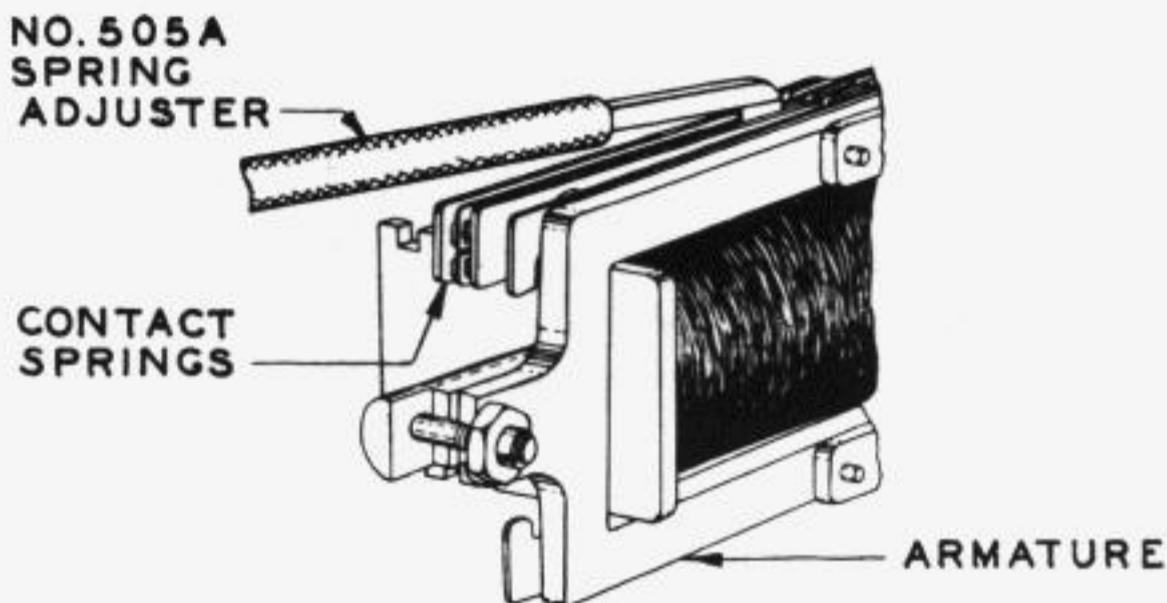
METHOD OF ADJUSTING SPRING TENSION
